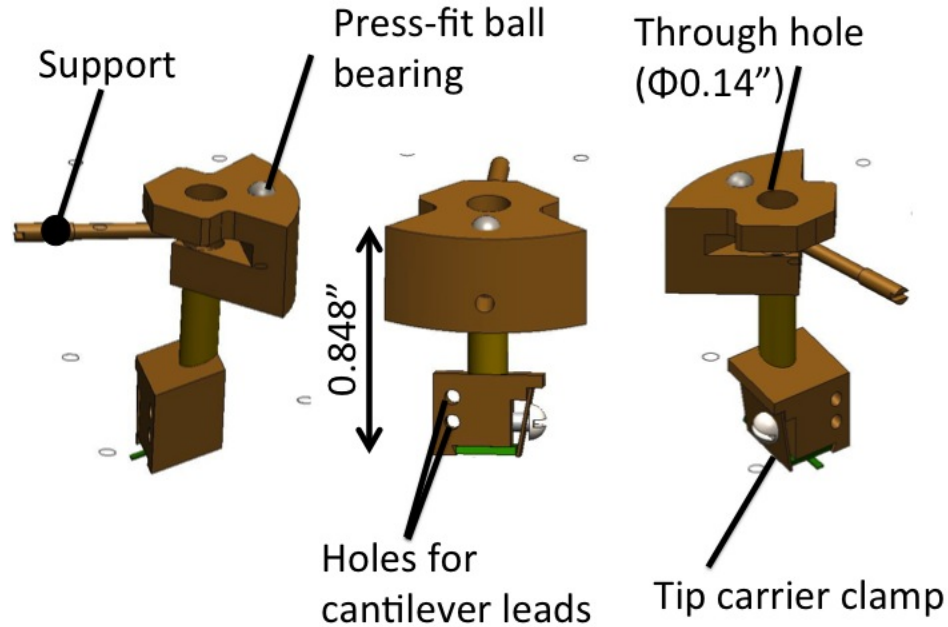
Illustration of the tip holder at different angles. There are three major components of the tip holder-slider, support and the clamp. Slider is the top part that consists of ball bearing on top and sits on top of the upper head. This is screwed onto the clamp (bottom end of the tip holder) via the 0.14" through hole. The support is a brass rod that is screwed onto the upper head and it's solely used to keep the tip holder from falling during room temperature alignment. The clamp holds the tip carrier chip and has two through holes for the cantilever leads. Solidworks File: tip holder.sldasm
